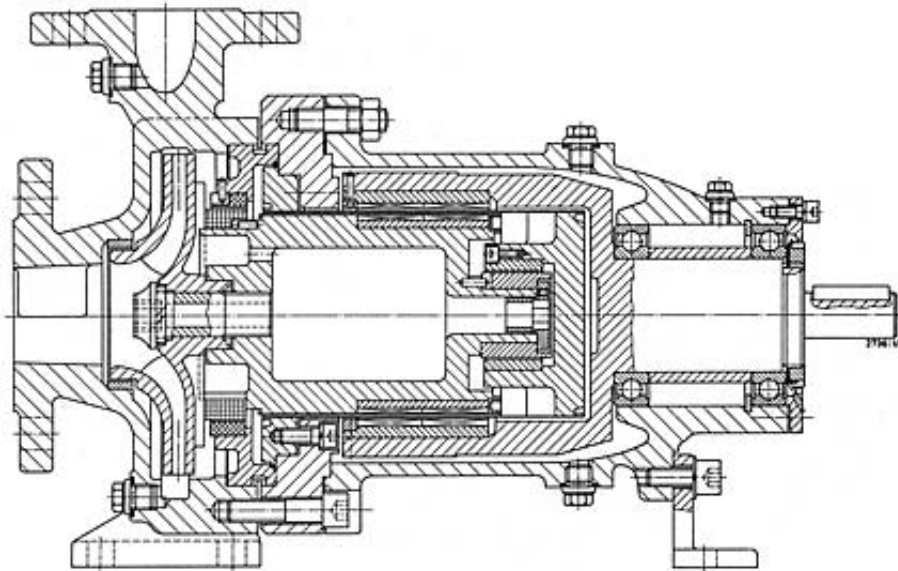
Chemical pump with drive over permanent magnetic coupling
